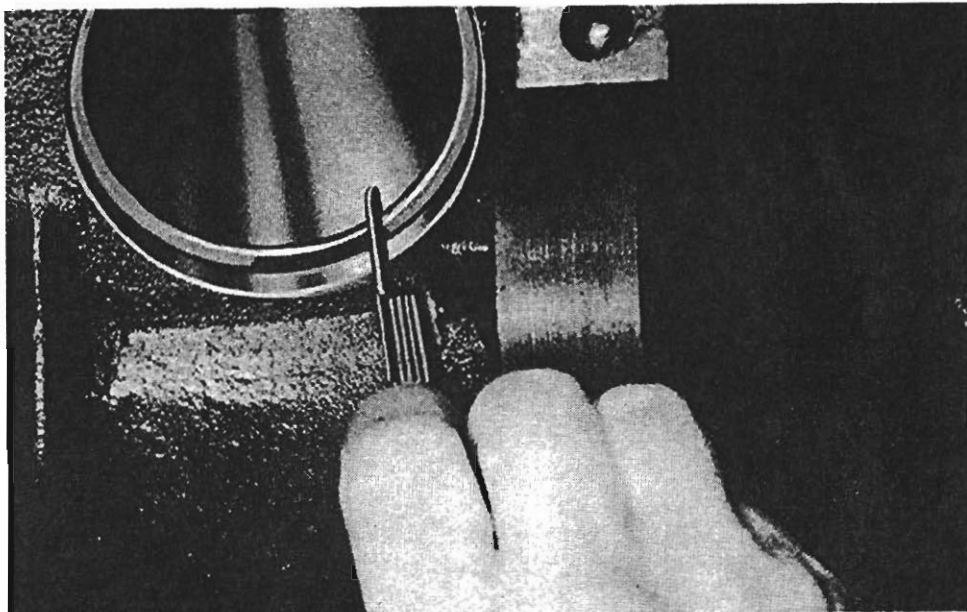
Checking Piston Ring Gap. Ring Gap Should Be Checked at the Bottom or Unworn Part of the Cylinder.
